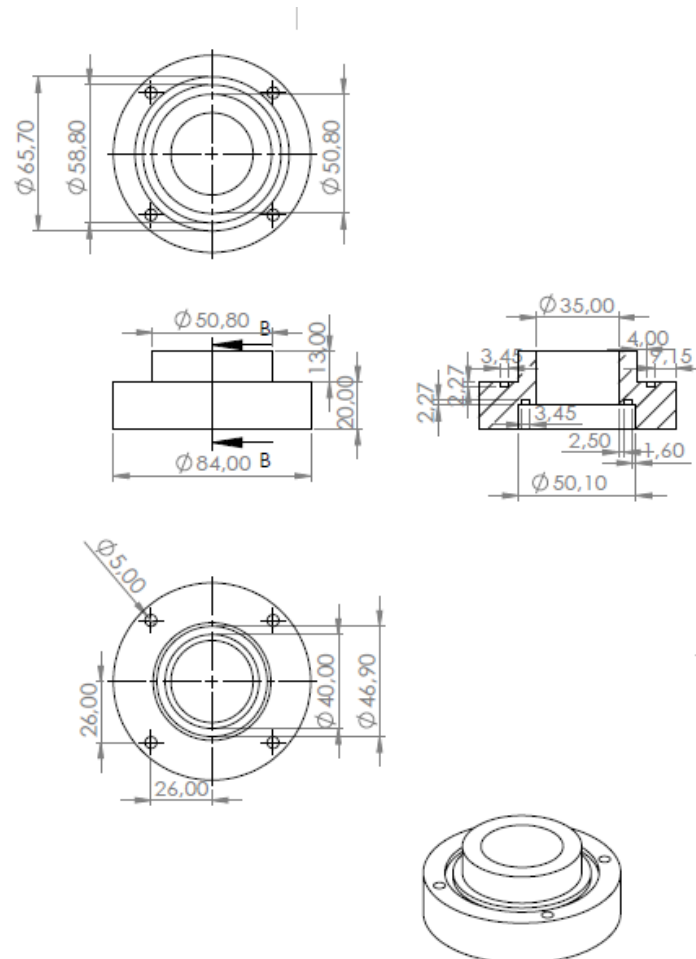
Technical drawing of the glass holder mentioned in the second chapter
